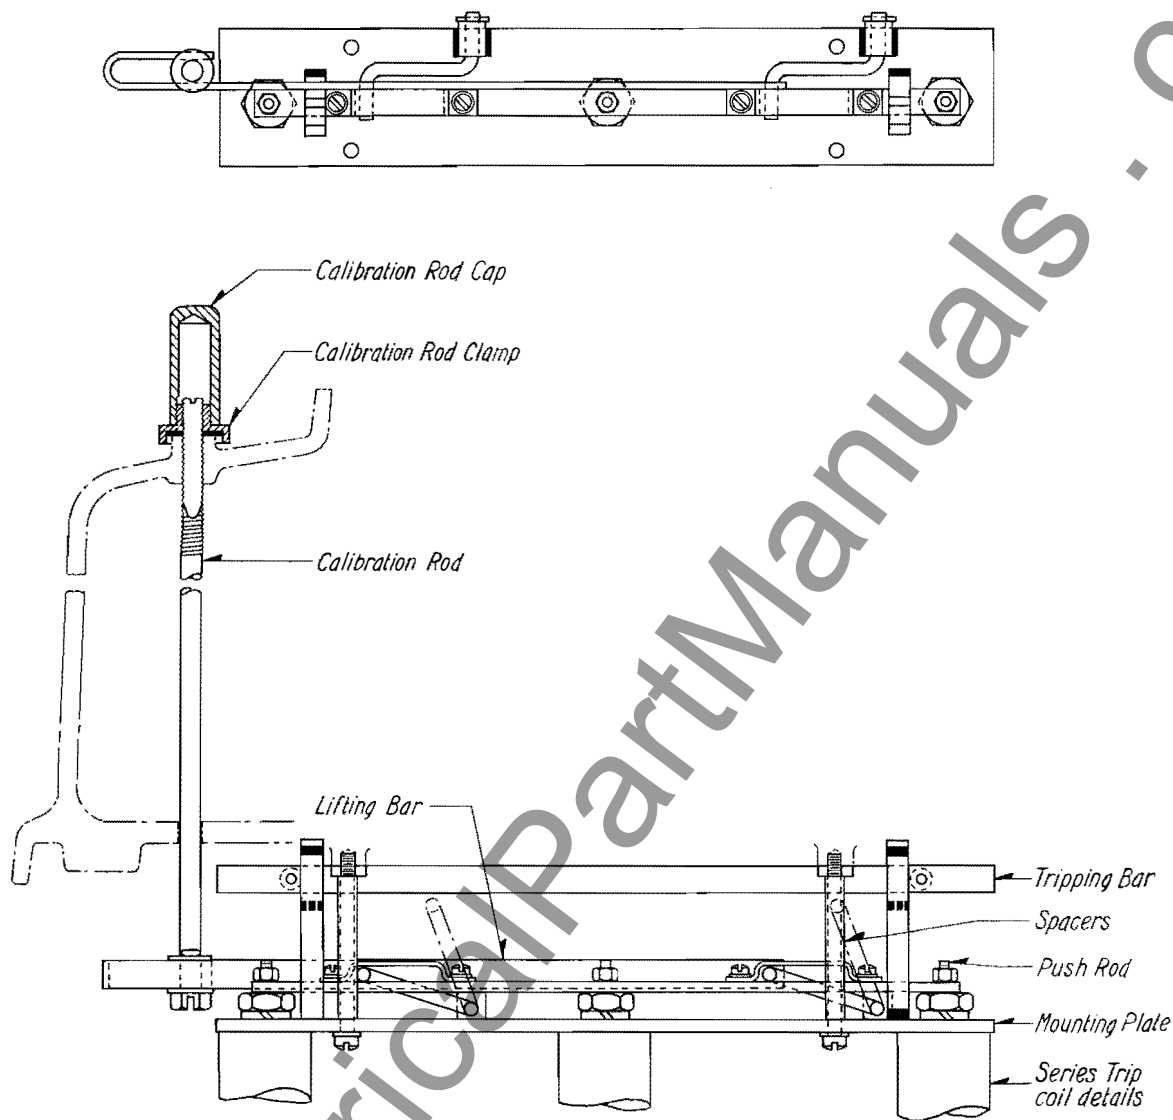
SERIES TRIP ATTACHMENT AND MOUNTING PLATE
